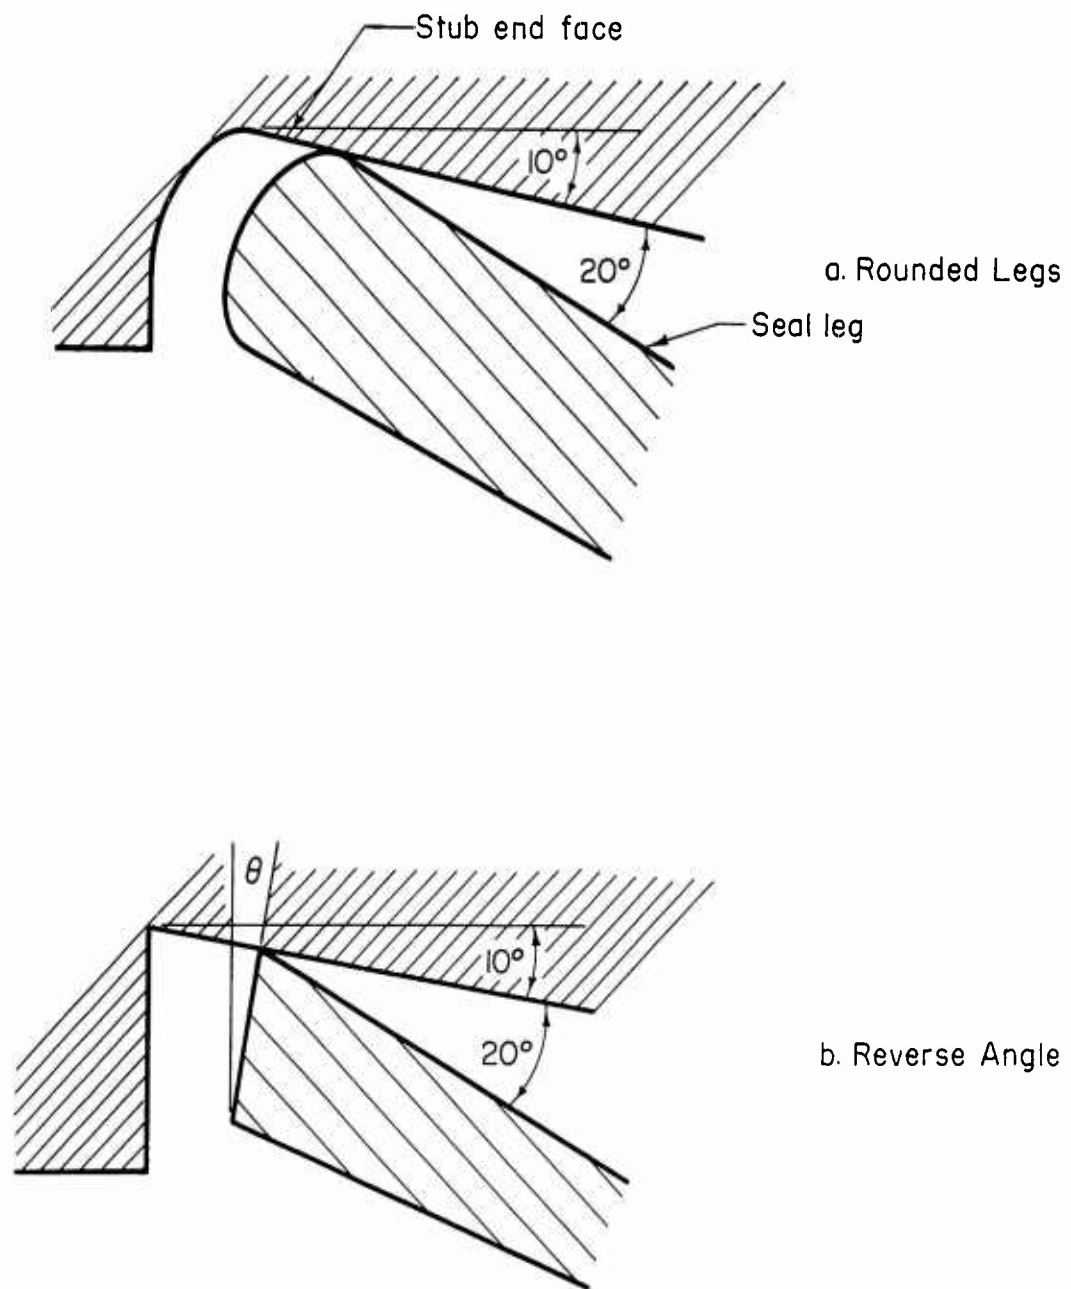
SEALING SURFACE GEOMETRIES INVESTIGATED FOR THE OUTSIDE BOBBIN SEAL
